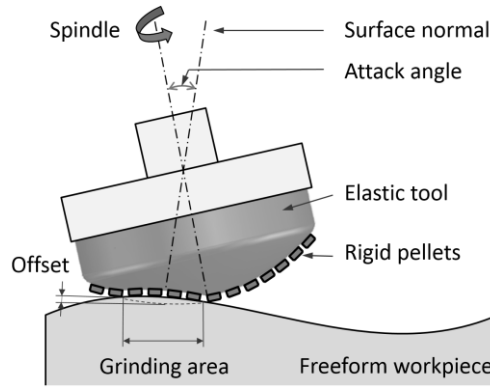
Principle of Shape Adaptive Grinding (SAG) [16].
